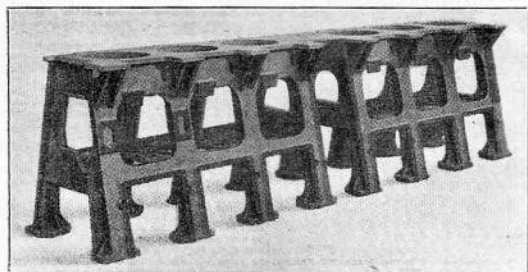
Completed Columns for Six-cylinder Oil Engine.
